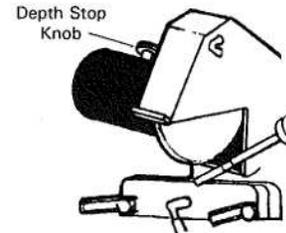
DEPTH STOP KNOB LOCATION.
